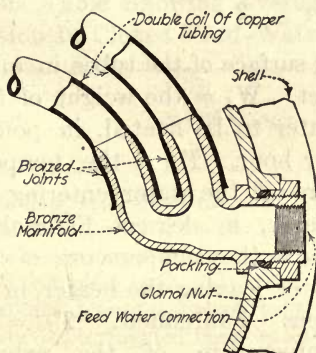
Inside Manifold Of Whitlock Double-Coil Closed Heater.
